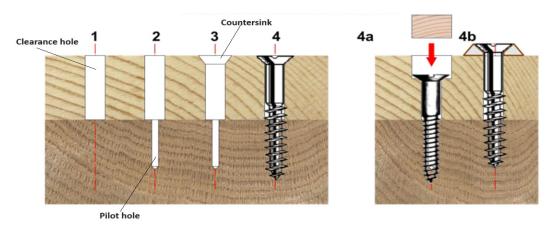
Fitting Screws with Clearance Hole, Pilot Hole, and Countersink
